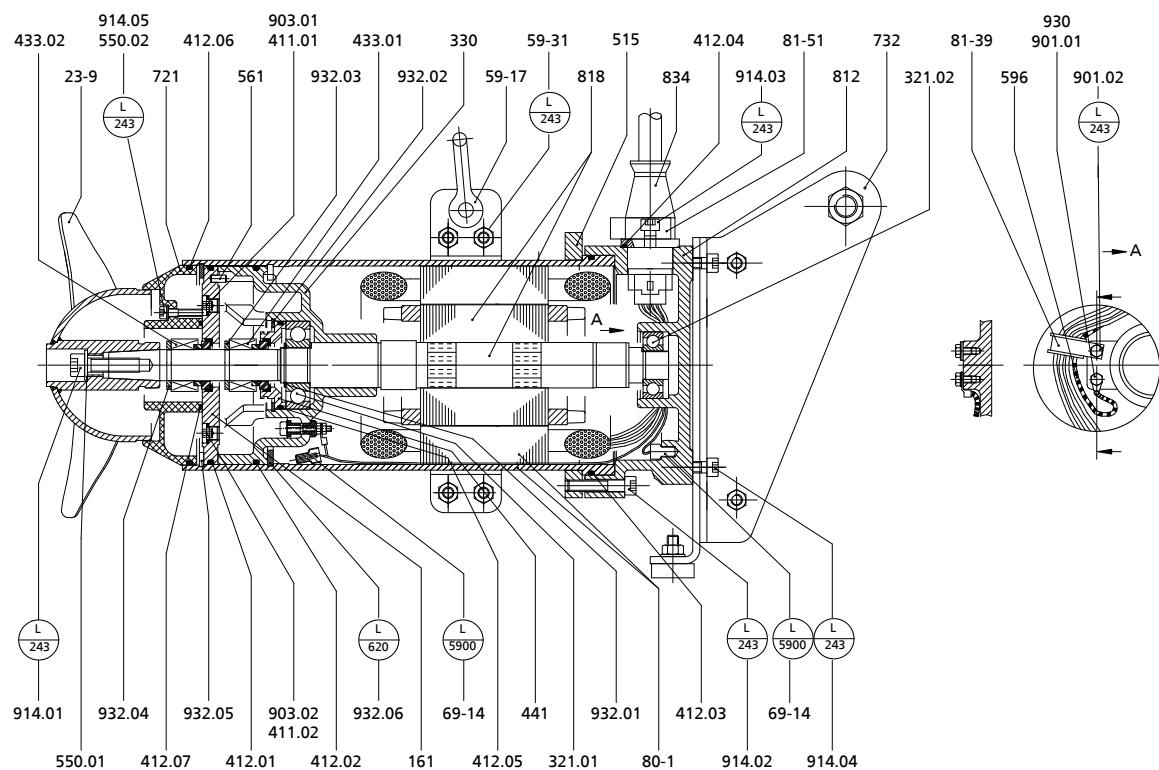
General assembly drawing of Amamix 200, motor housing material stainless steel
